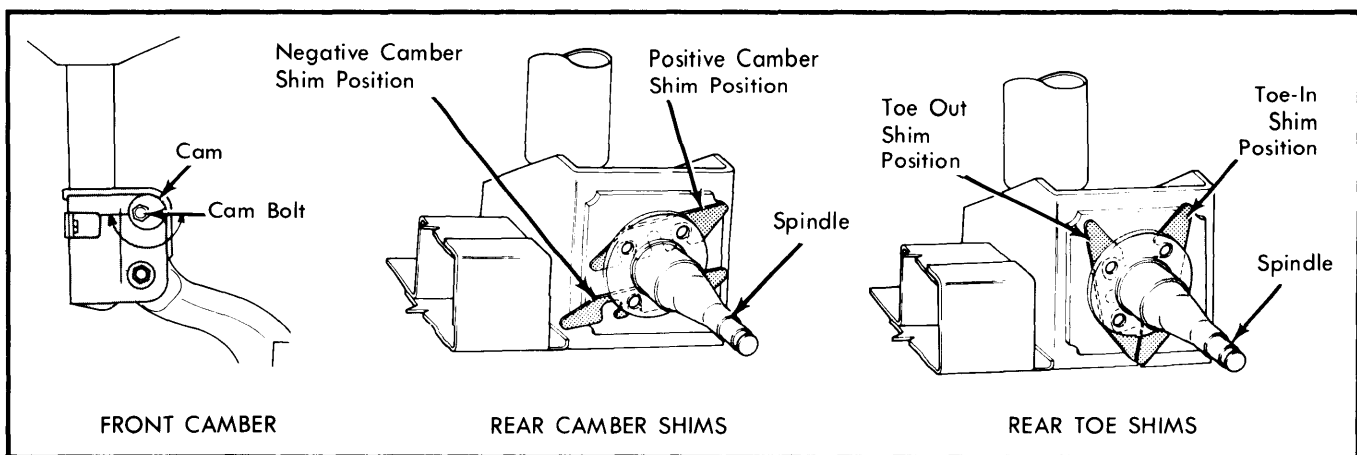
Adjusting Camber & Toe (Front & Rear)
